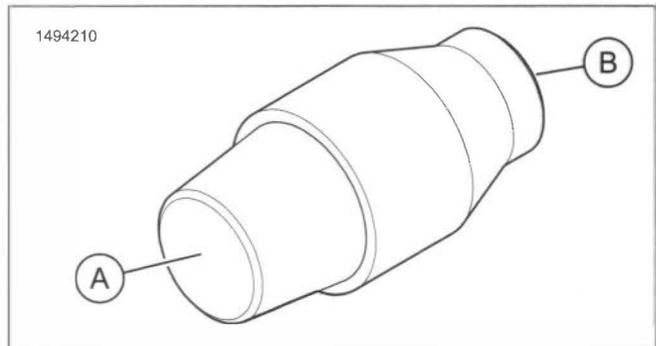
Rotor Shell to Starter Drive Assembly Pilot - HD-52970
